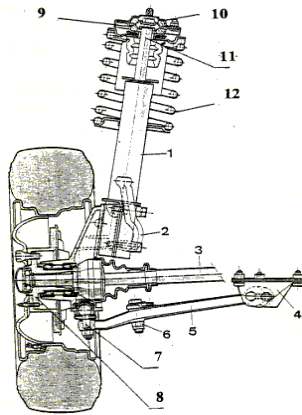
McPherson's front suspension [10]: 1 – shock absorber; 2 – steering knuckle arm; 3 – drive shaft, 4 – support of articulated mounting of the lower rocking lever (screwed to the bodywork cross-bar); 5 – lower rocking lever; 6 – lower rocking lever pivot; 7 – ball-and-socket joint of the rocking lever; 8 – steering knuckle; 9 – elastic column-to-bodywork mounting; 10 – upper spring plate; 11 – shock absorber piston rod; 12 – suspension spring
